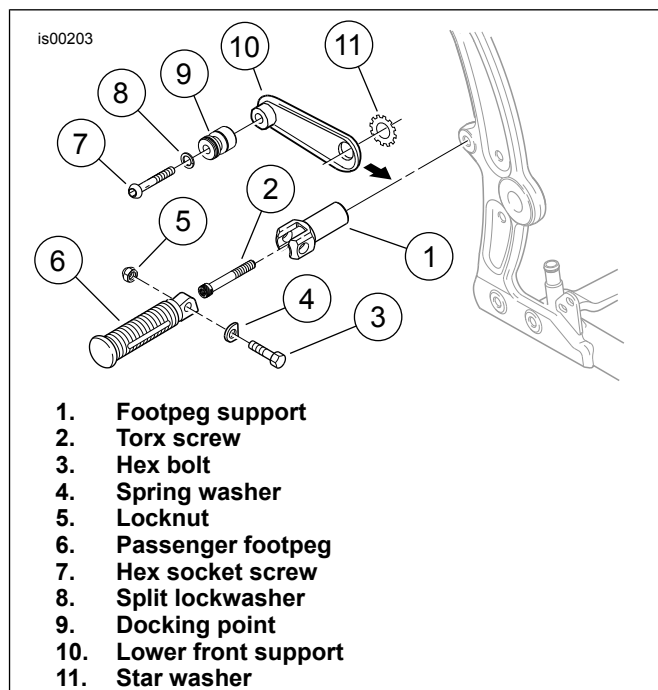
Lower Front Saddlebag Support (Left Side All, Right Side Without Shotgun Exhaust)
